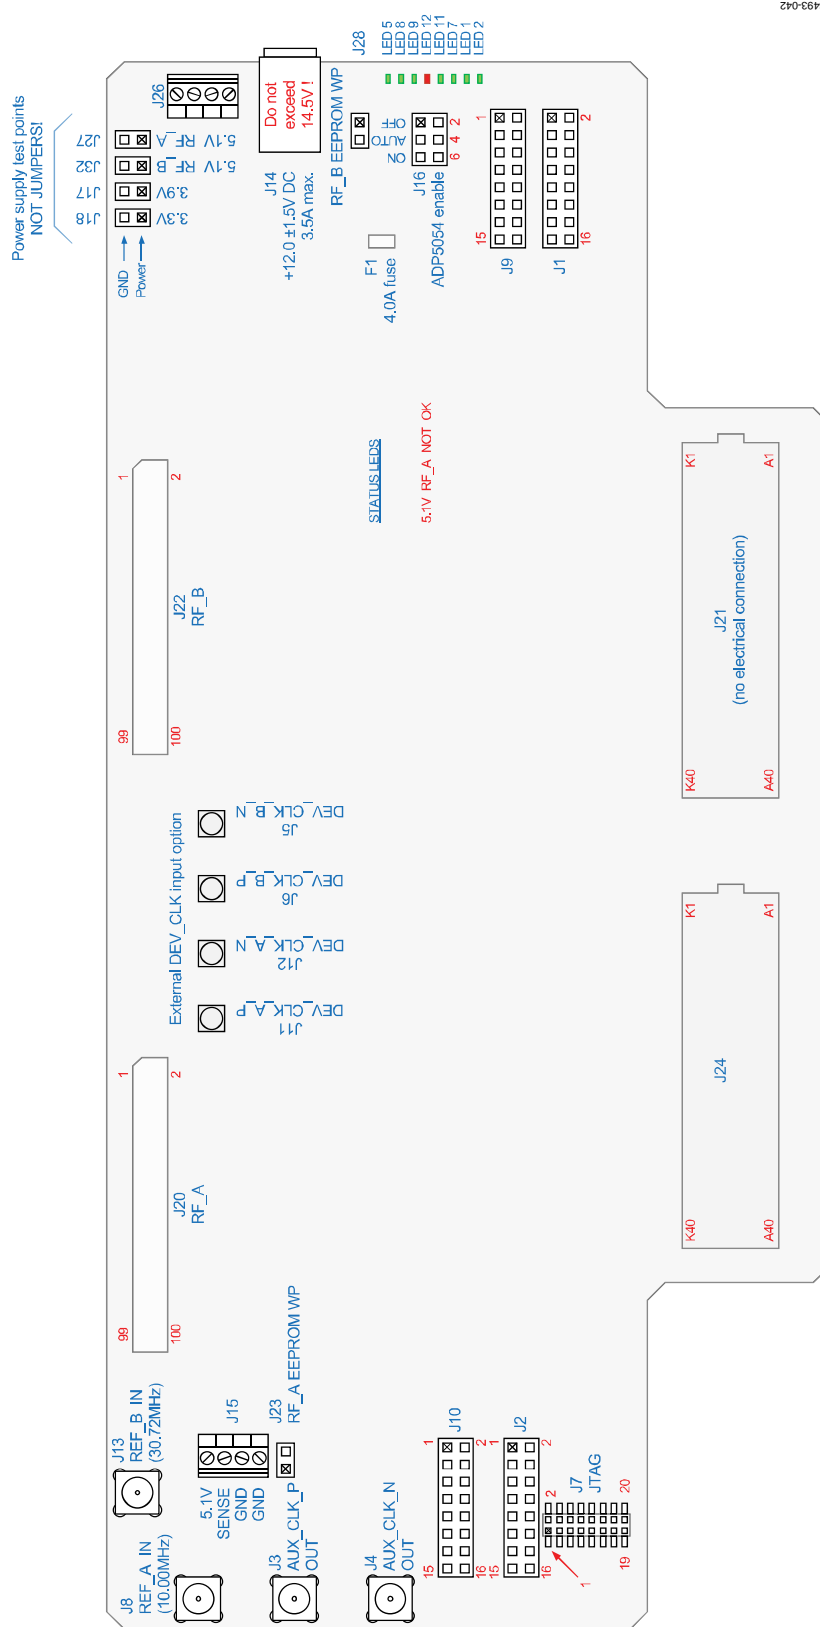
ADRV-INTERPOS1/PCBZ Board Layout Schematic
